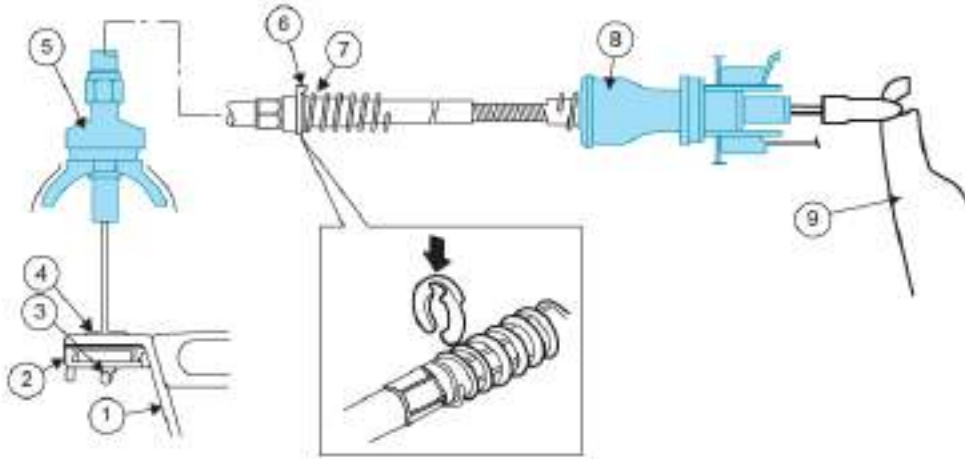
Clutch cable: 1, clutch release lever; 2, retaining clip; 3, seating plate; 4, rubber pad; 5, cable end fixed to gearbox or clutch housing; 6, spring retaining clip; 7, self-adjusting spring; 8, cable end fixed to bulkhead; 9, clutch pedal
